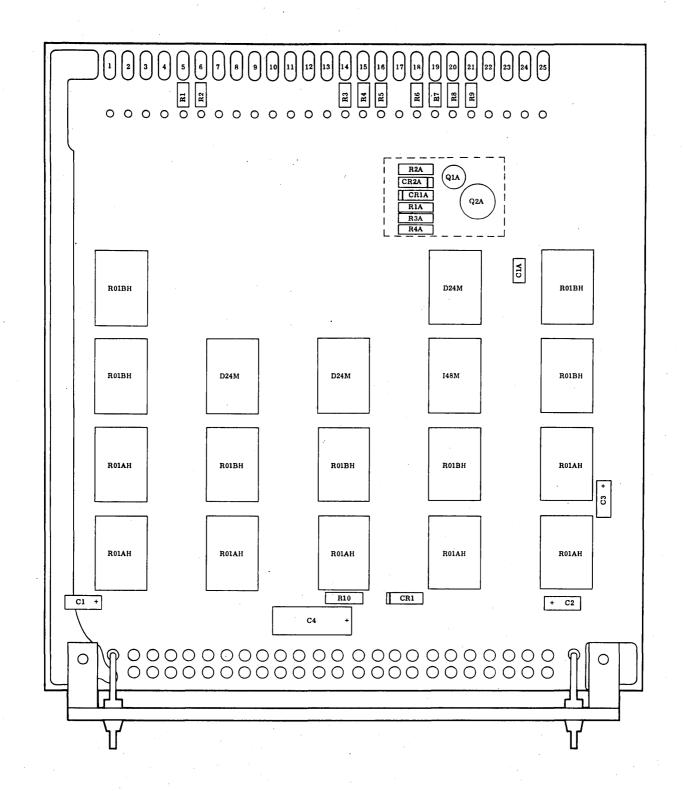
PROTECT AND EQUIPMENT SELECT (BG) CARD, PANEL ASSEMBLY
